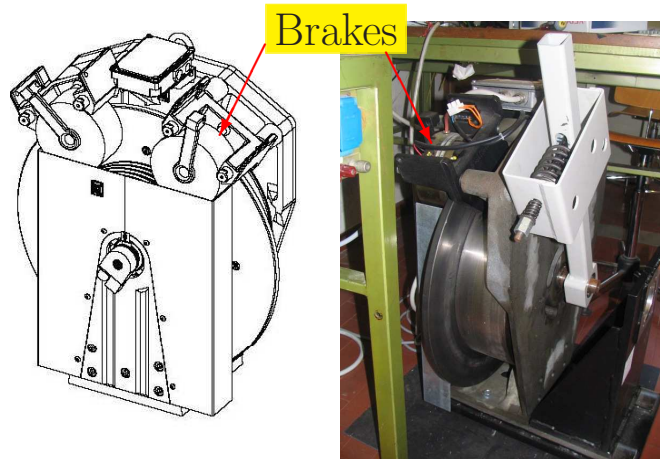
Motor drawing (left) and mass-spring test bed (right)
